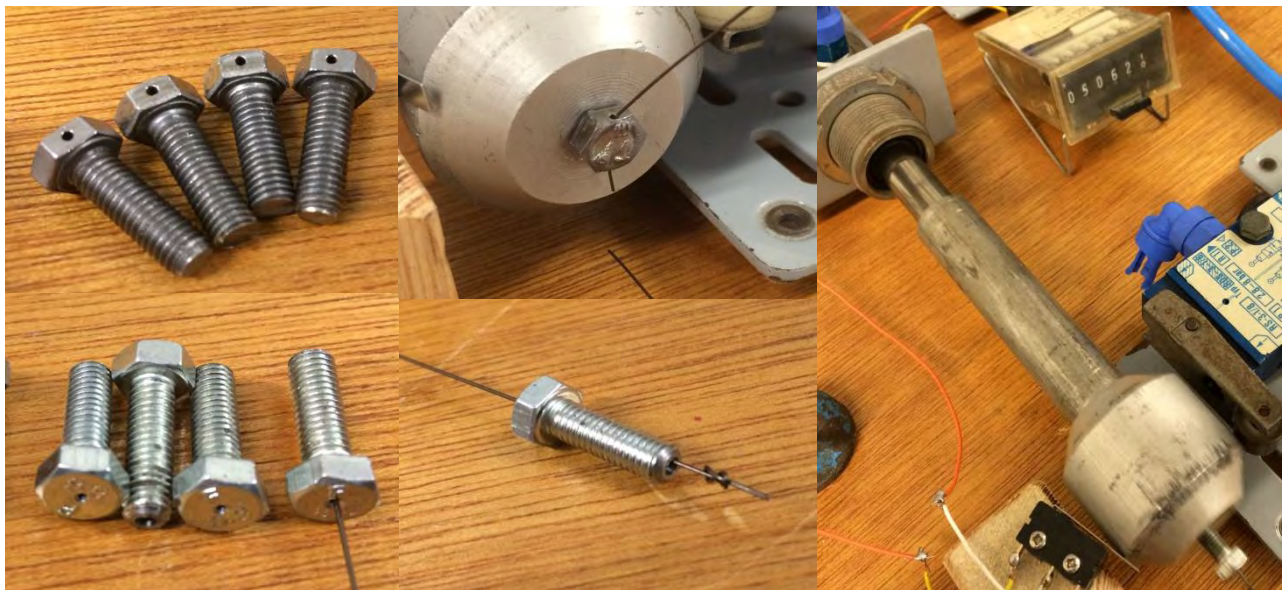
Actuating cable attachment screws with transverse holes (top left & centre) and axial holes (bottom left & centre) with mechanical stopper tube (right)
